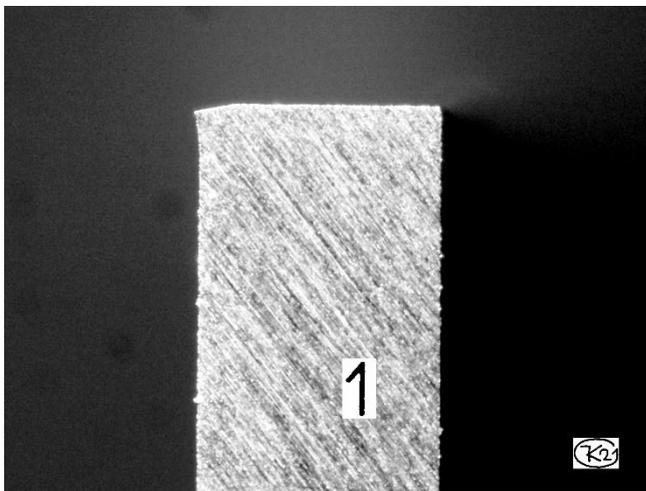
Cutting burr and cutting edge of a 0.8 mm (1/32") thick 90° card scraper, one edge burnished
